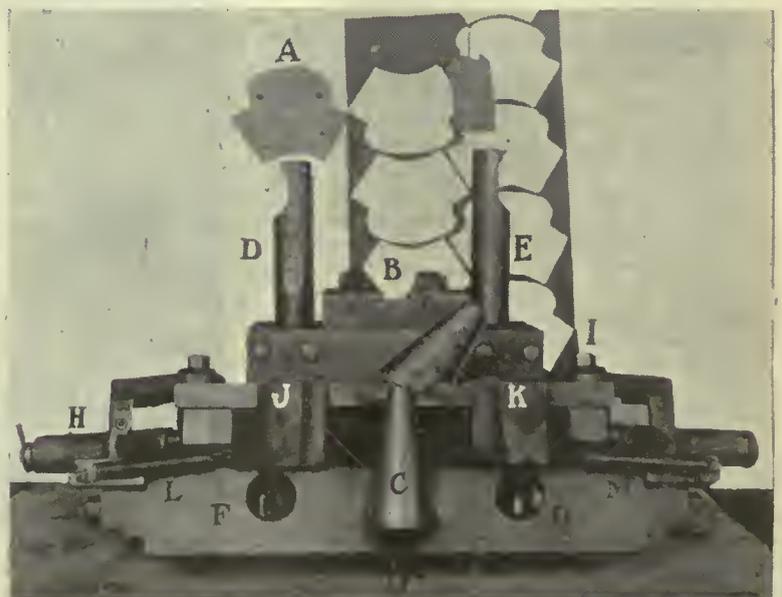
A DIE FOR FORMING TUBE SPOUT.
